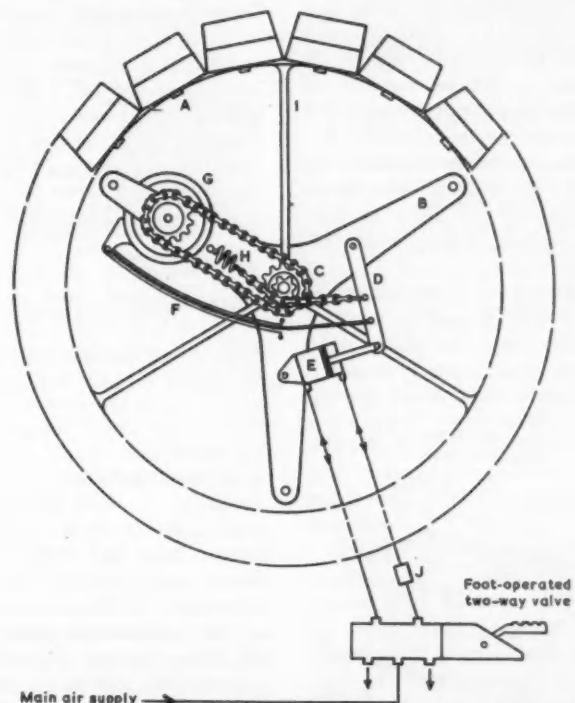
The Rotassembler's pneumatically operated indexing system makes it possible to assemble up to 2000 components in an hour. A, ring of 38 hoppers; B, Y-plate; C, ratchet and fixed gears on drive shaft; D, pivoted lever; E, Maxam air cylinder; F, brake cable; G, brake assembly; H, spring for chain slack; I, spokes attached to support ring; J, Maxam restrictor valve to slow outward/return movement of piston; K, Maxam foot-operated valve
